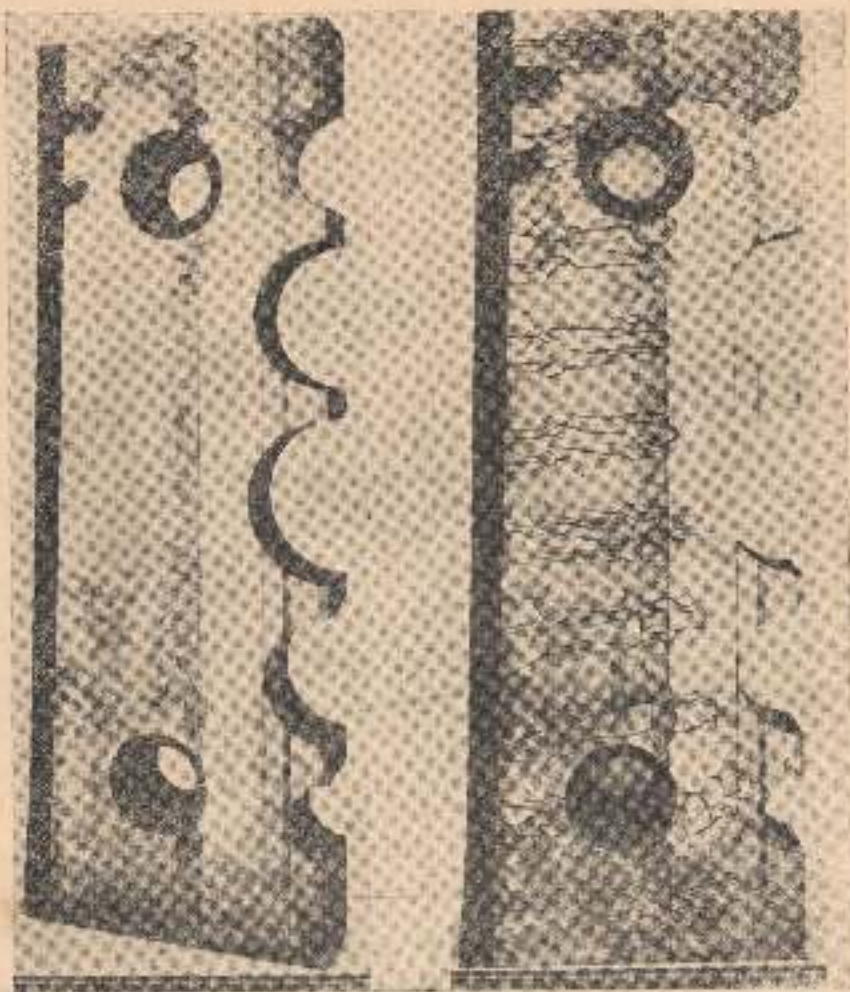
(Left) Visual surface appearance of shear blade made of Type S1 tool steel after grinding operation. Note the network-type cracks and spalled areas.
